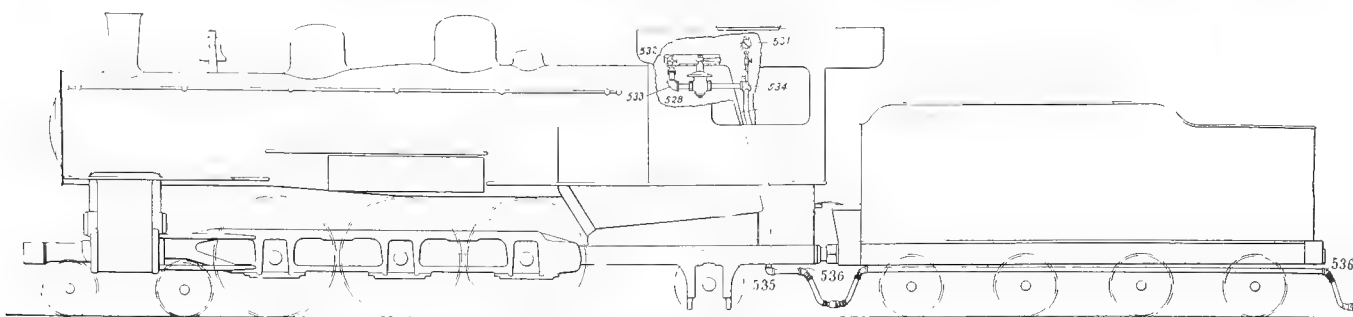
Arrangement of Gold's Heating Apparatus on Locomotive and Tender.
